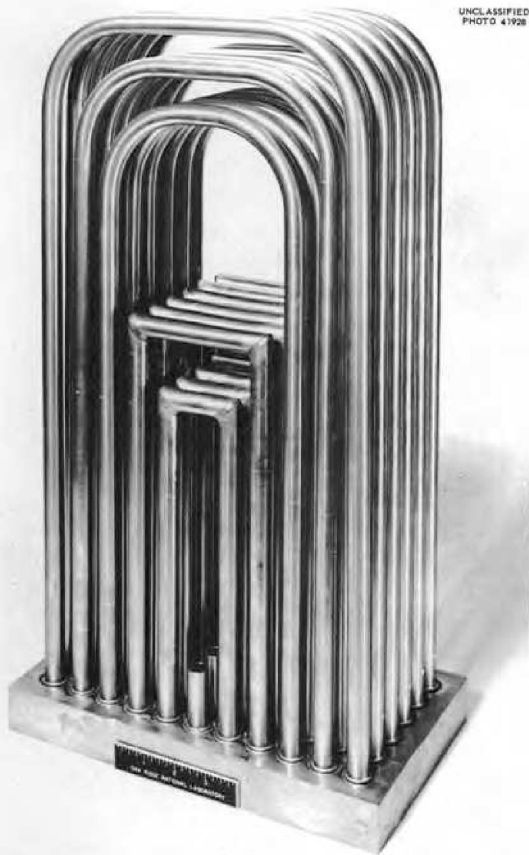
Tube Side of Fill-and-Drain-Tank Sample.
